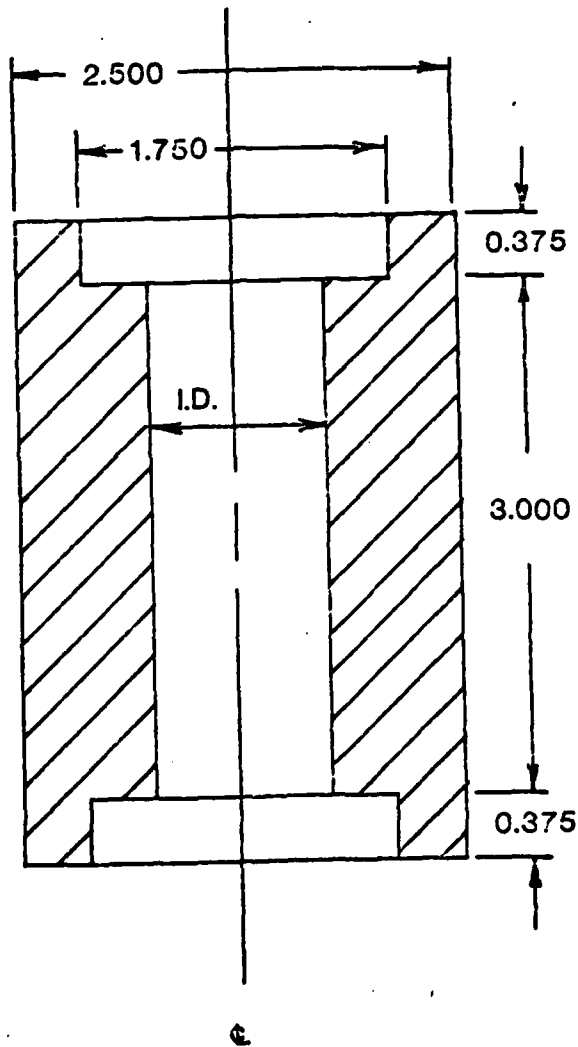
Detail Drawing of Hollow Quartz Cylinder
